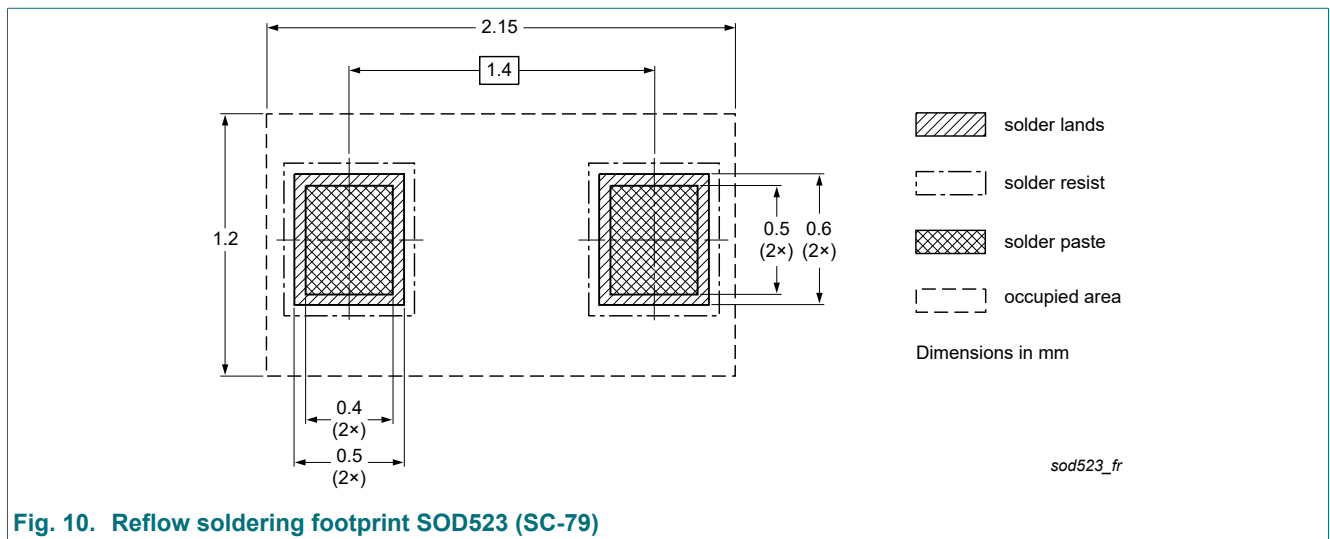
Reflow soldering footprint SOD523 (SC-79)
